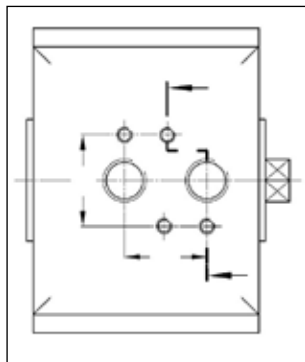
NAMUR bore pattern for solenoid valve mounting without piping
